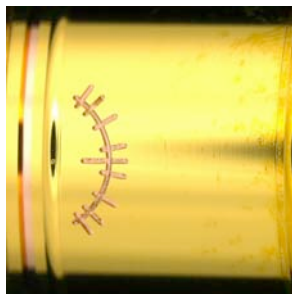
Photograph of the starburst pattern on a Au hohlraum.
